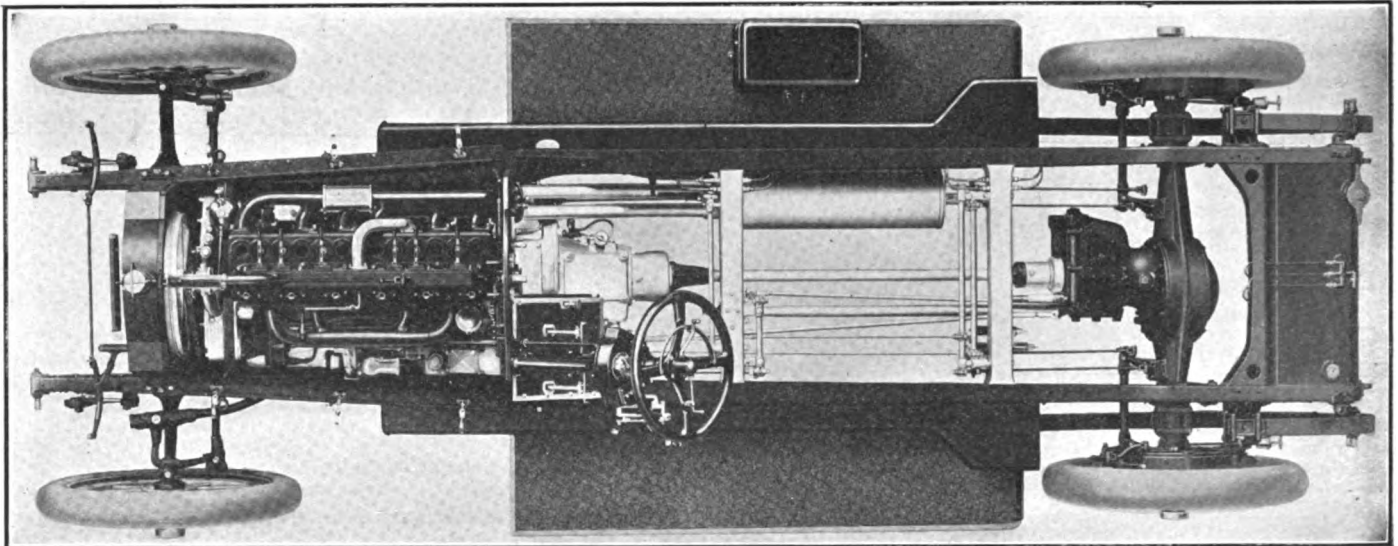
Plan view of the chassis of the Packard 3-38 6 cylinder car for the 1915 season
